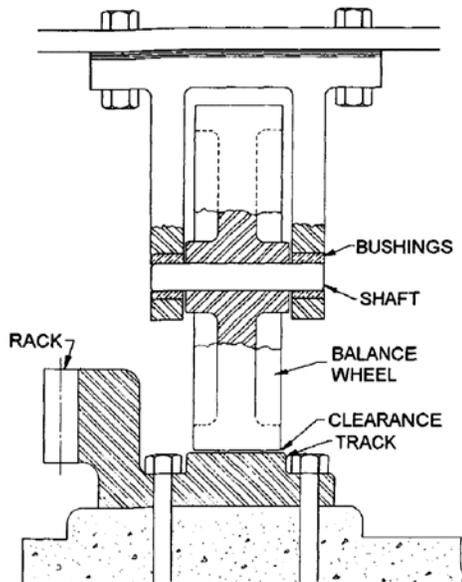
A balance wheel assembly where the rack teeth have been machined into the curved track
